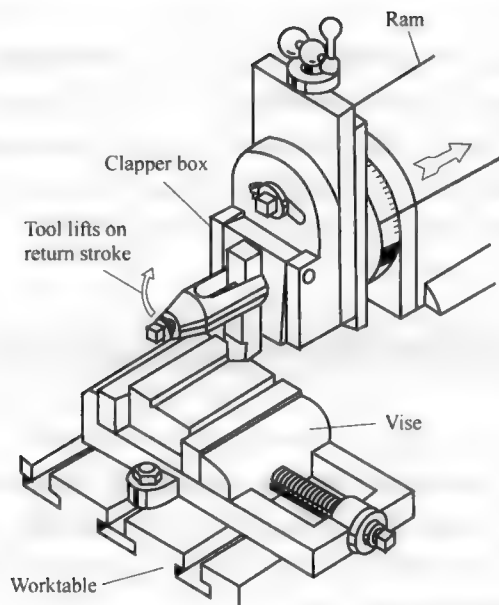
Typical arrangement of the workpiece and the tool in a shaper
